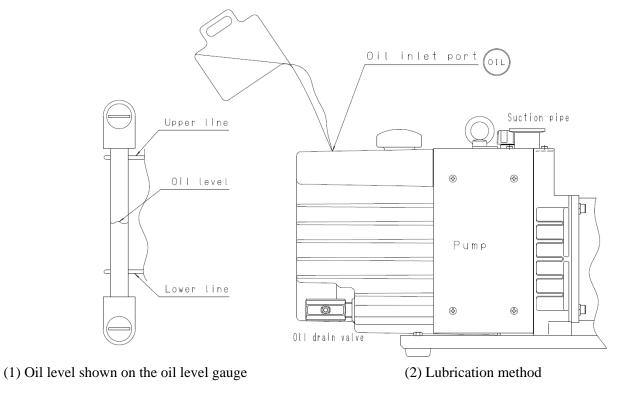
Lubrication of the oil sealed rotary vacuum pump
